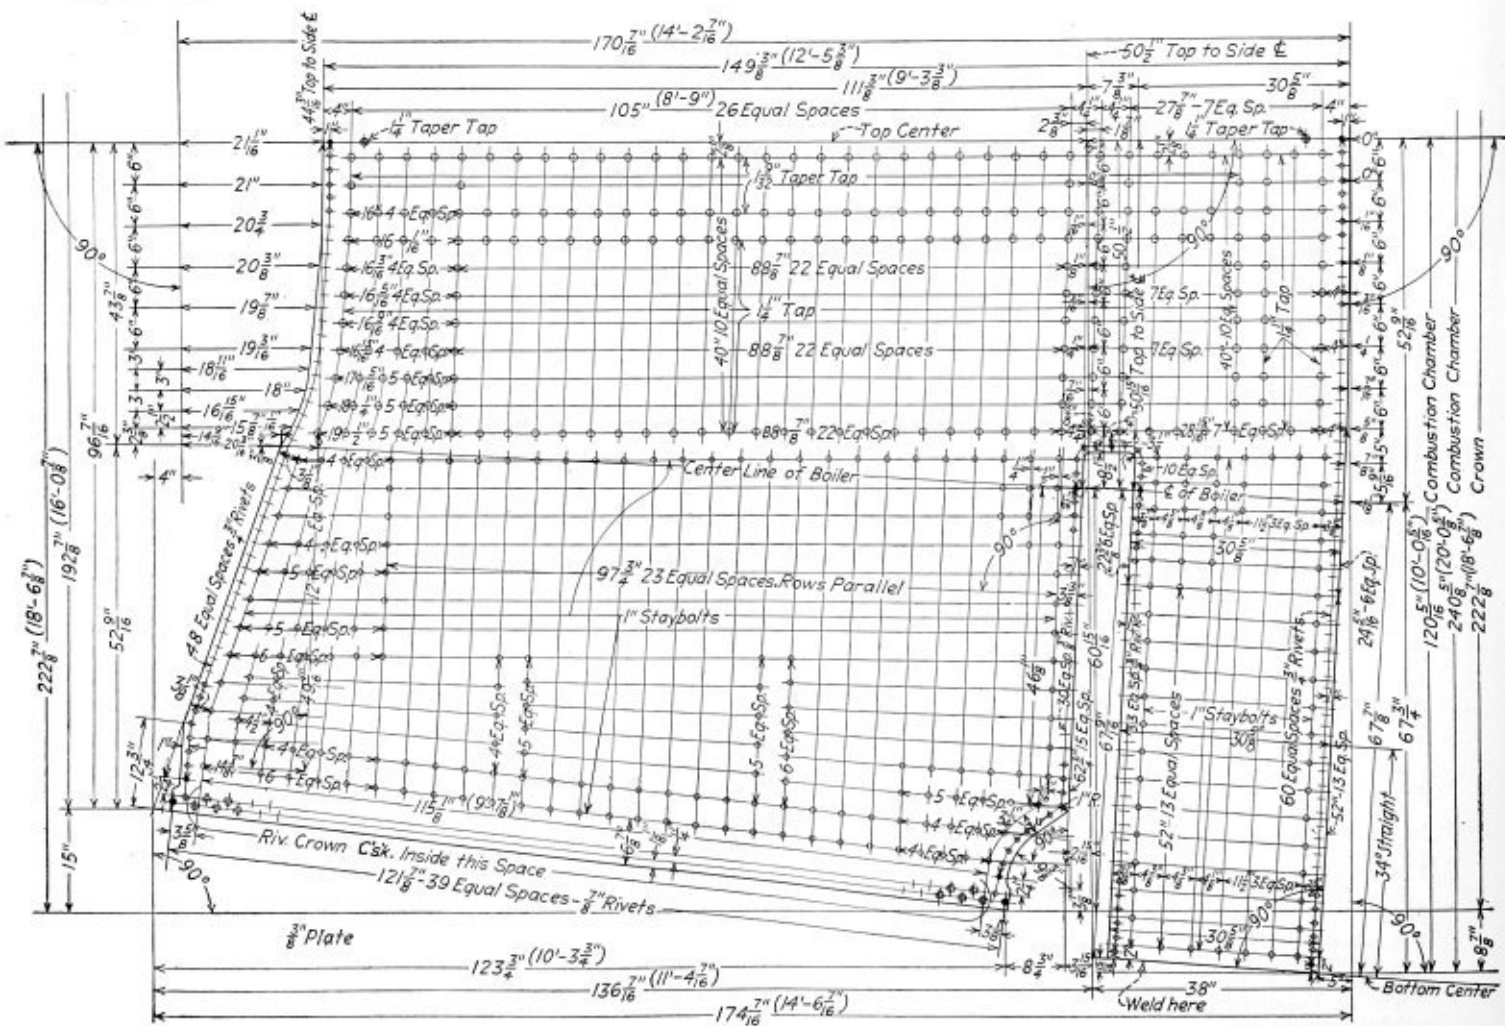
Development of crown and side sheets, combustion chamber boiler
